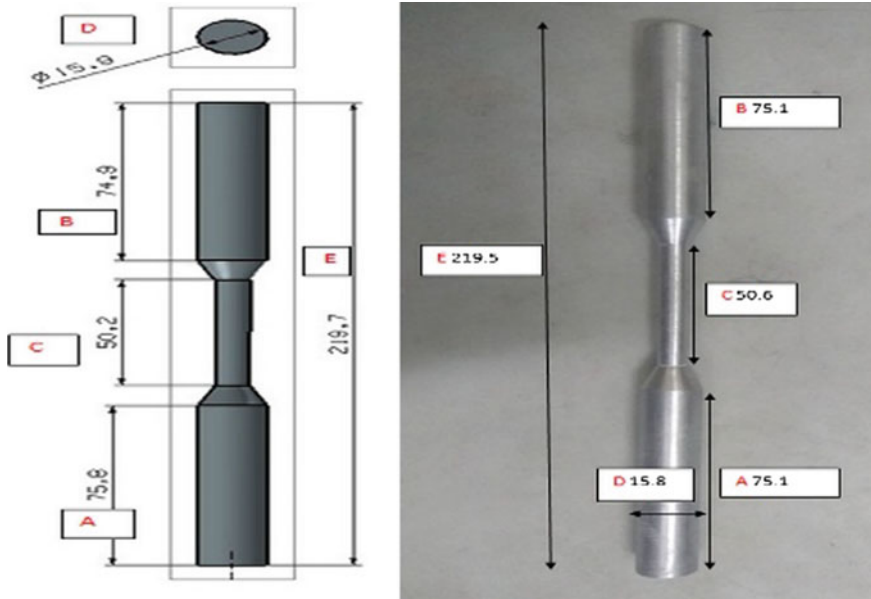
Scanned and actual dimensions of tensile test specimen 2
